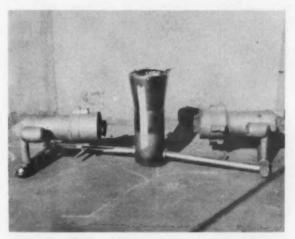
Casting setup to show centrifugal gating technique, shell graphite cores used in forming center of part.
